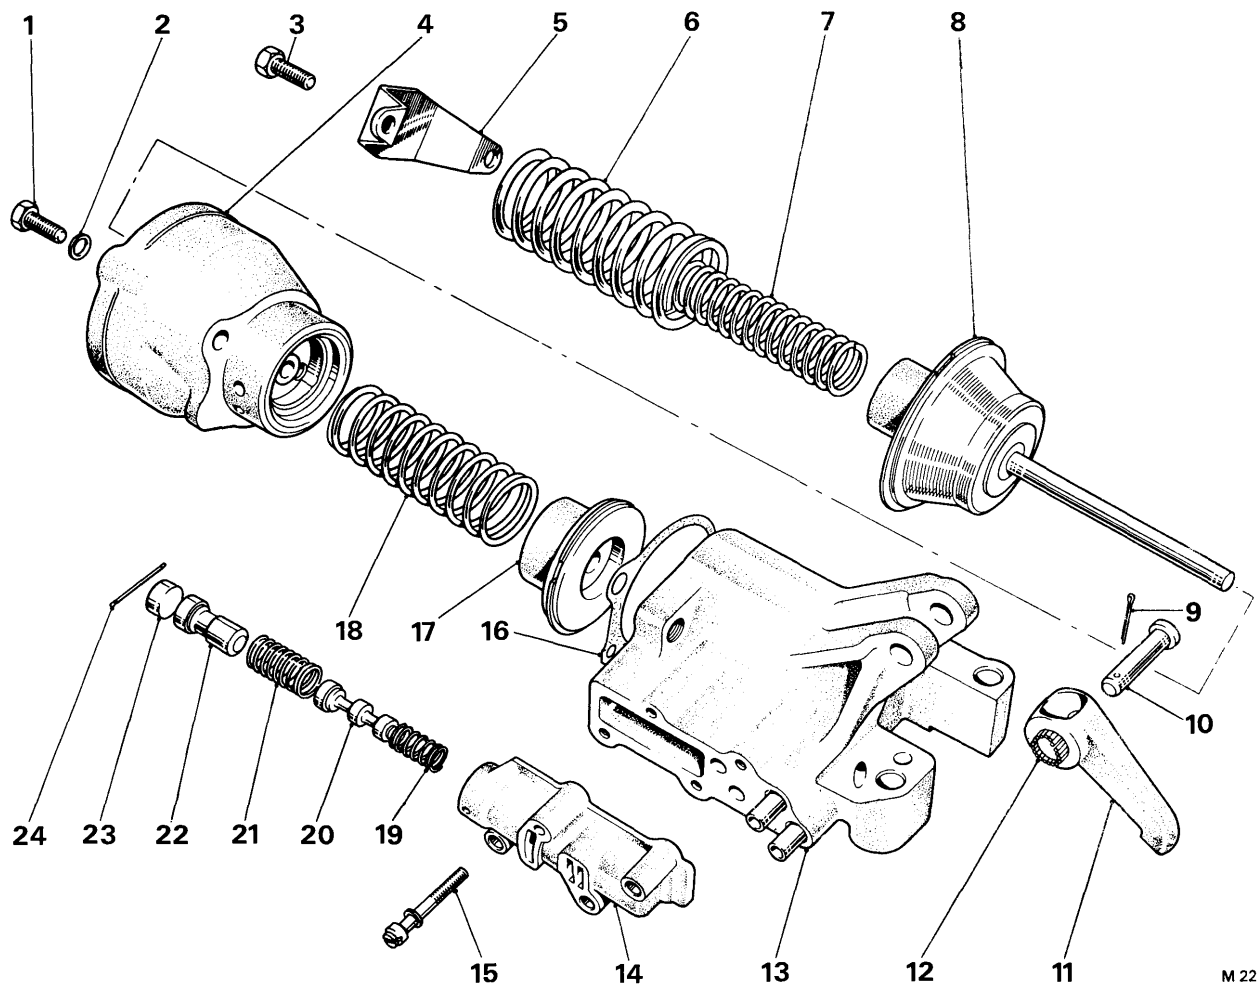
REAR SERVO AND ACCUMULATOR—EXPLODED
